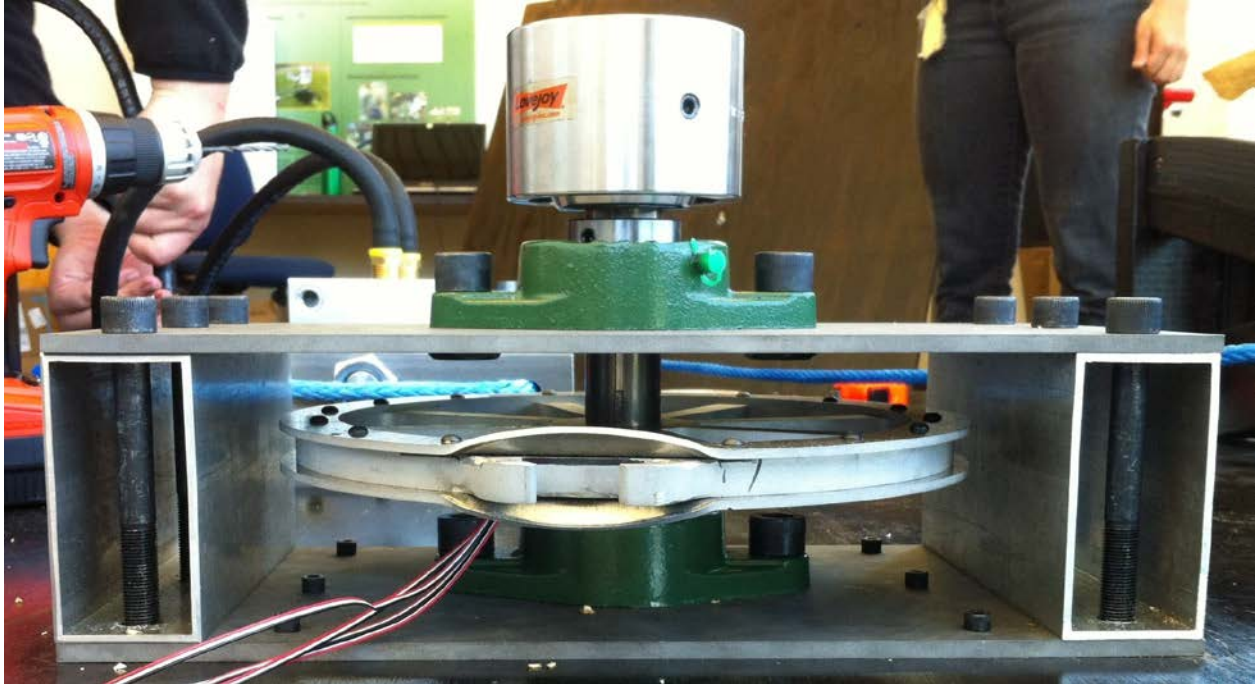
Assembly of the Pulley in its Support Structure with Half of the Coupler Attached. Not Seen is the Shaft Collar Sitting Underneath the Pulley
